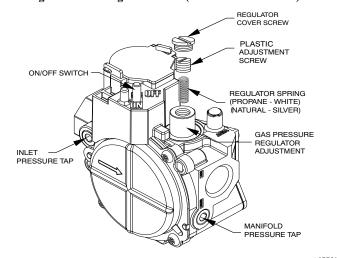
Single-Stage Gas Valve (460 VAC Models)
